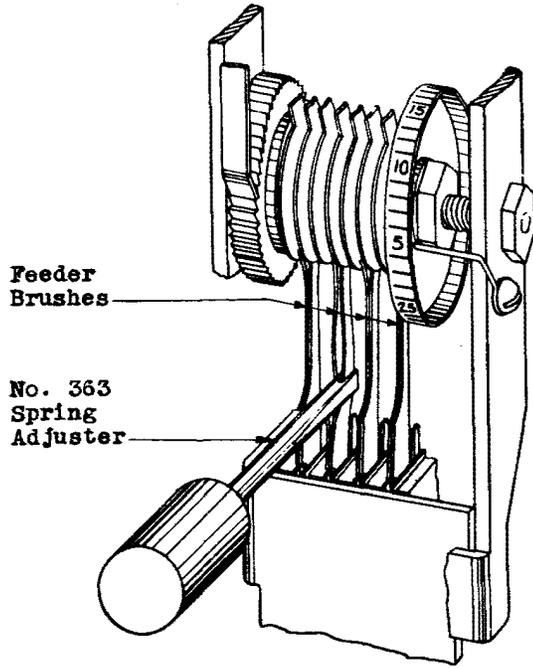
Method of Adjusting for Feeder Brush Closure
